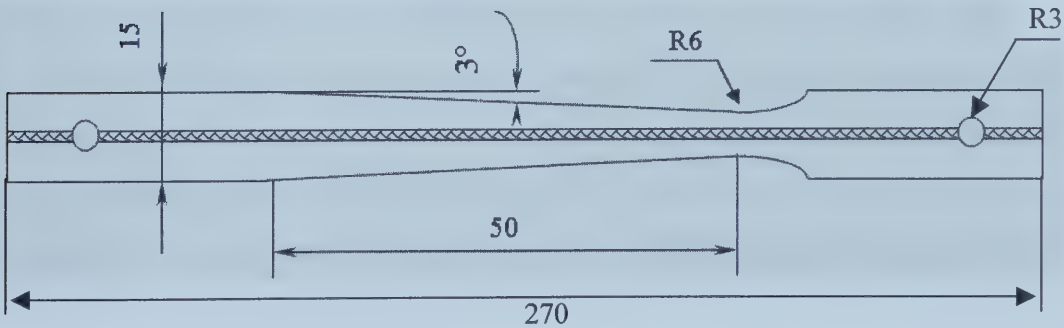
Tapered LW specimens with longitudinal weld: dimension in mm
